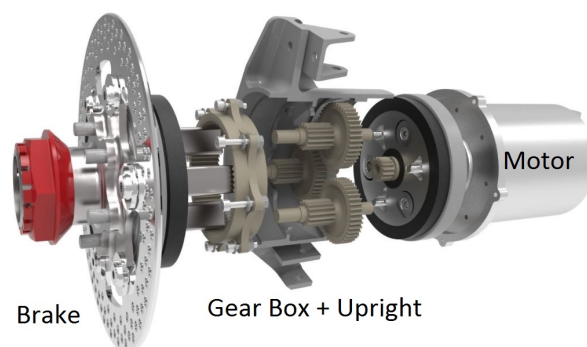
FST 07e motor, transmission box, upright and brake integration from right to left.
